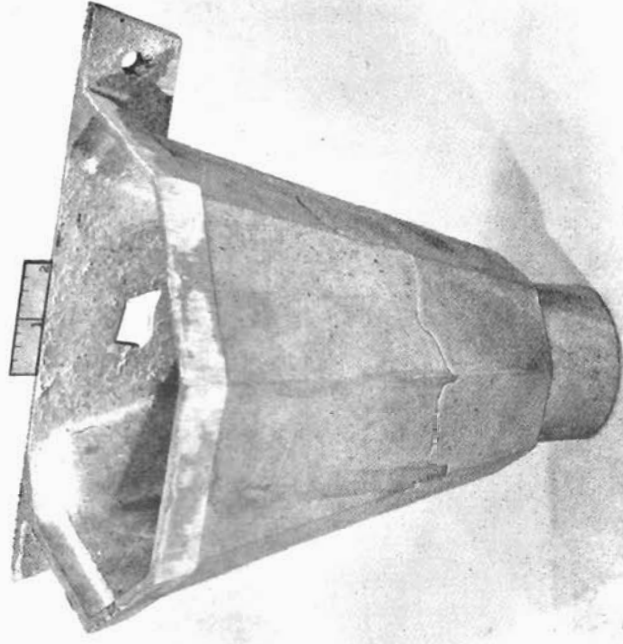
A cold shut or cold trap on the surface of an aluminium alloy sand casting.
